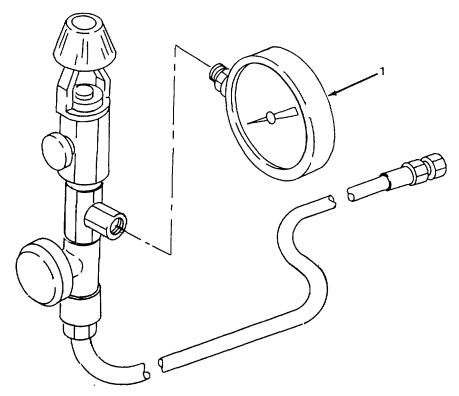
Air Tank Charging Whip Assembly, Calibrate.
